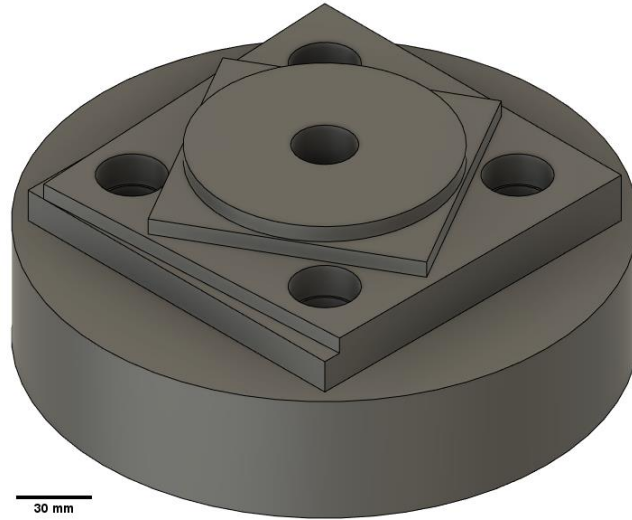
ISO-10791-7 Standard Machine Precision (CDS) Test Geometry [22].
